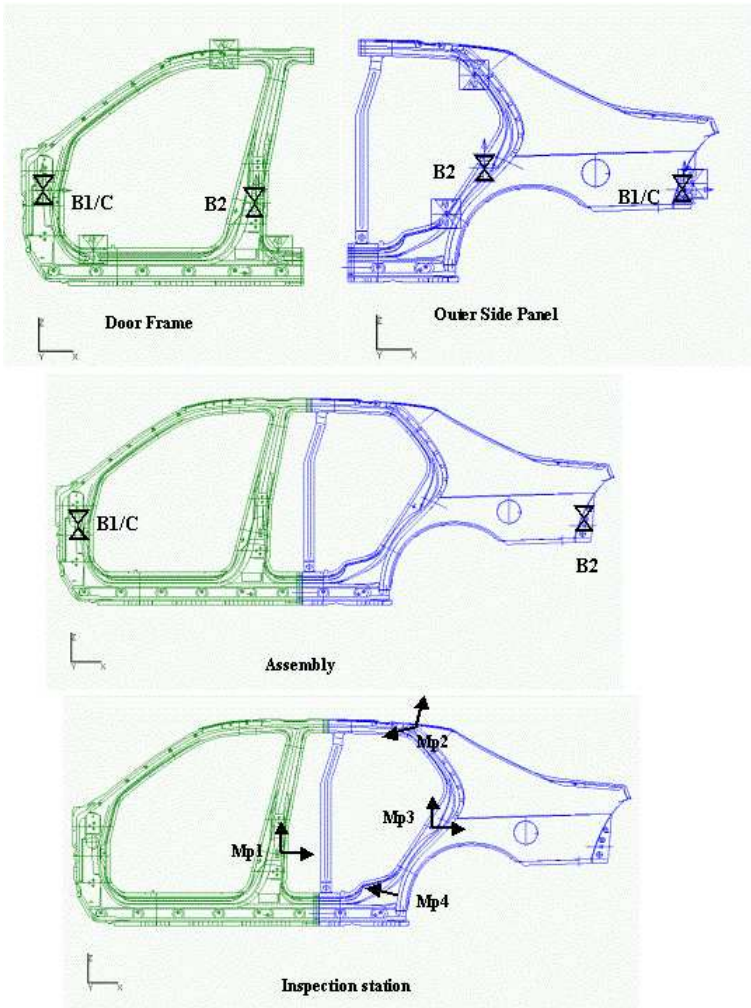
Top: The side panel assembly consists of the door panel and the outer side panel. Middle: The assembly is positioned in  $xz$ -direction using the locators labelled B1 and B2. Bottom: The assembly is measured in four inspection points.
